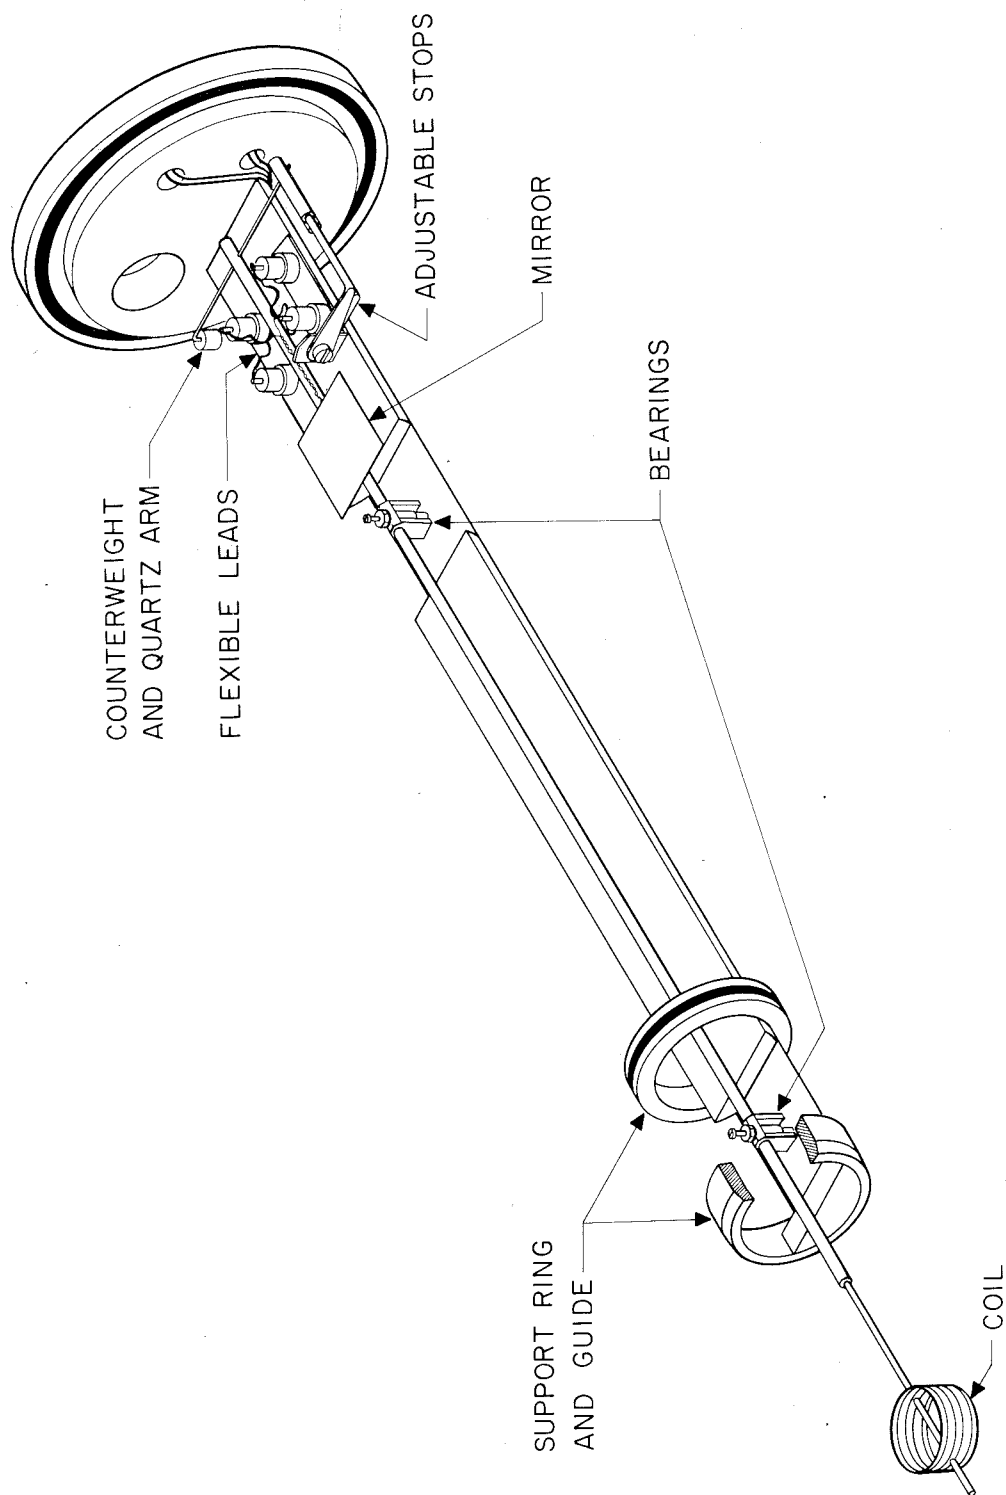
Overall view of the rebuilt fluxmeter assembly. The position of the assembly as installed in the spectrometer is shown in fig. 5, and the detailed construction of the bearings is shown in fig. 28. See text pp. 53 f.
